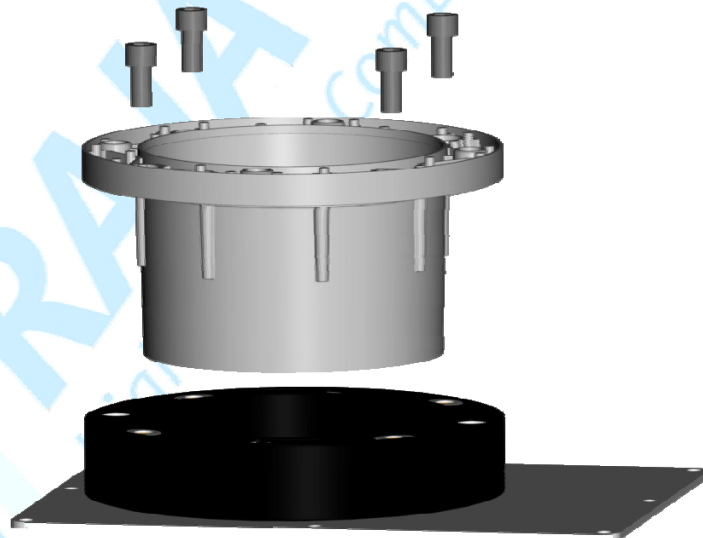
Fitting the damping ring, type DR../VS to the tank lid
